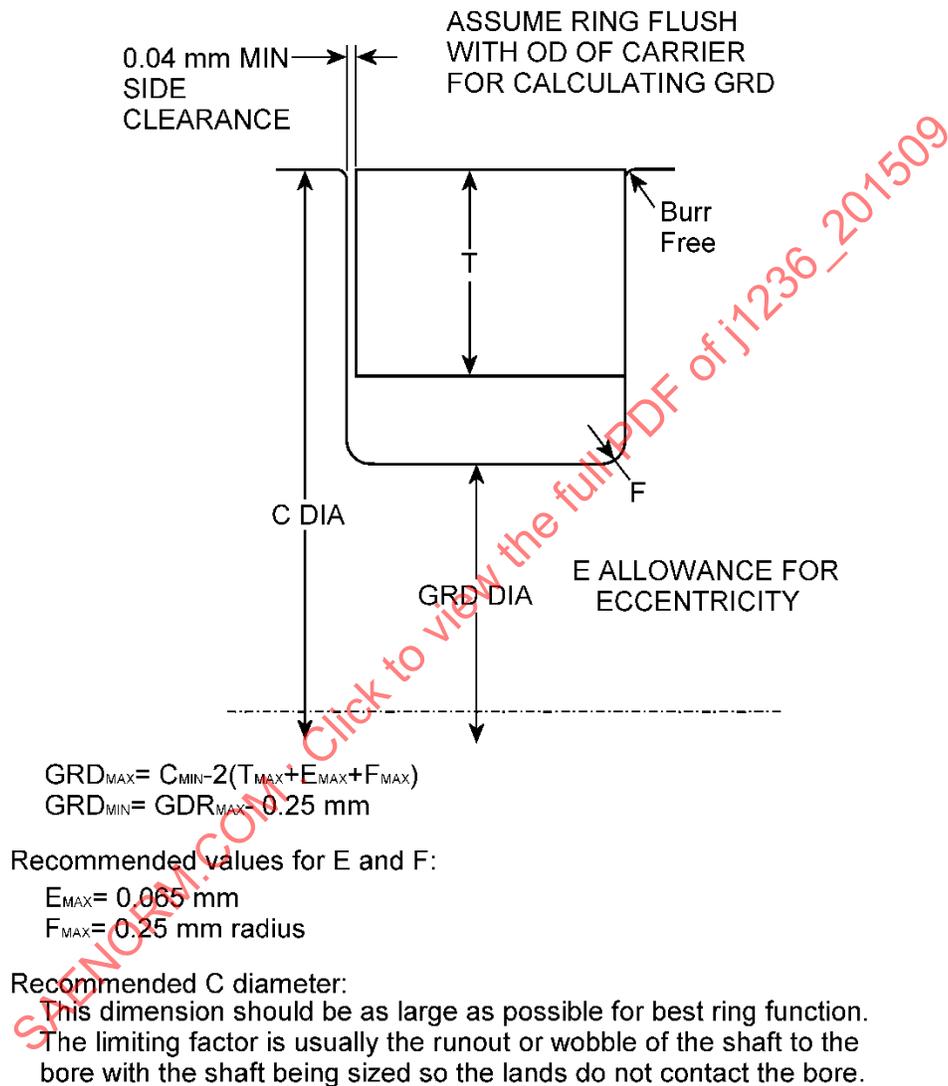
GROOVE DIAMETER AND SIDE CLEARANCE
